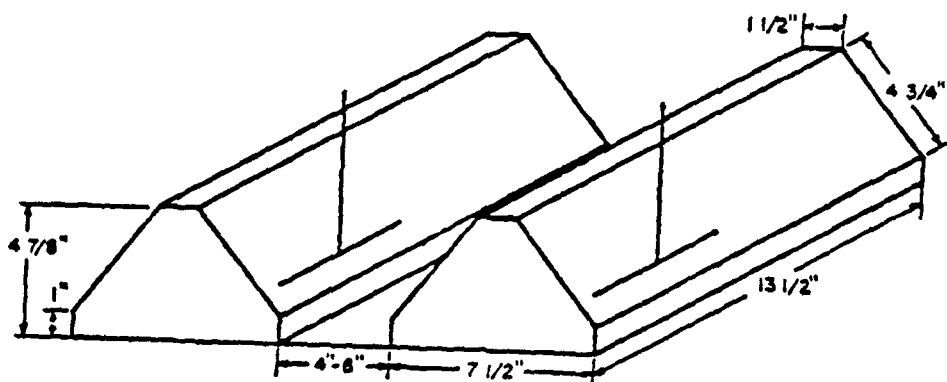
Double row array of 790 Symmetrical Heads run at 90 degrees
